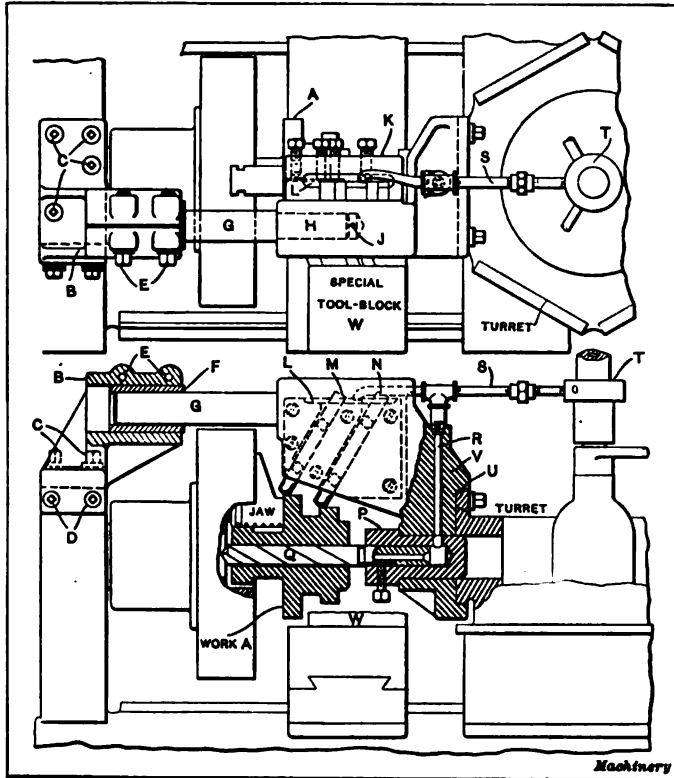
Piloted Multiple Turning Tool for Gear Blanks
